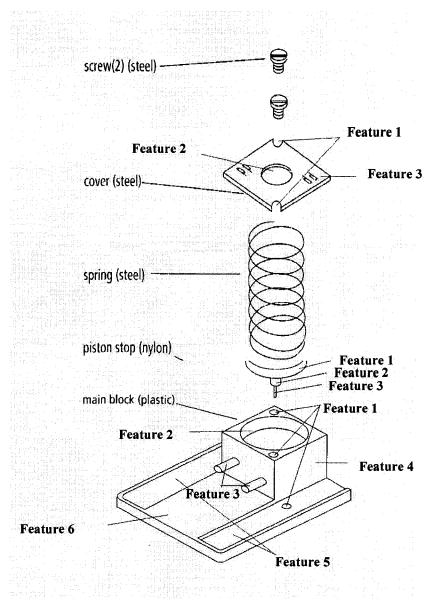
Example 1- Pneumatic piston sub-assembly (Before DFA) [Boothroyd and Dewhurst, 1987]
